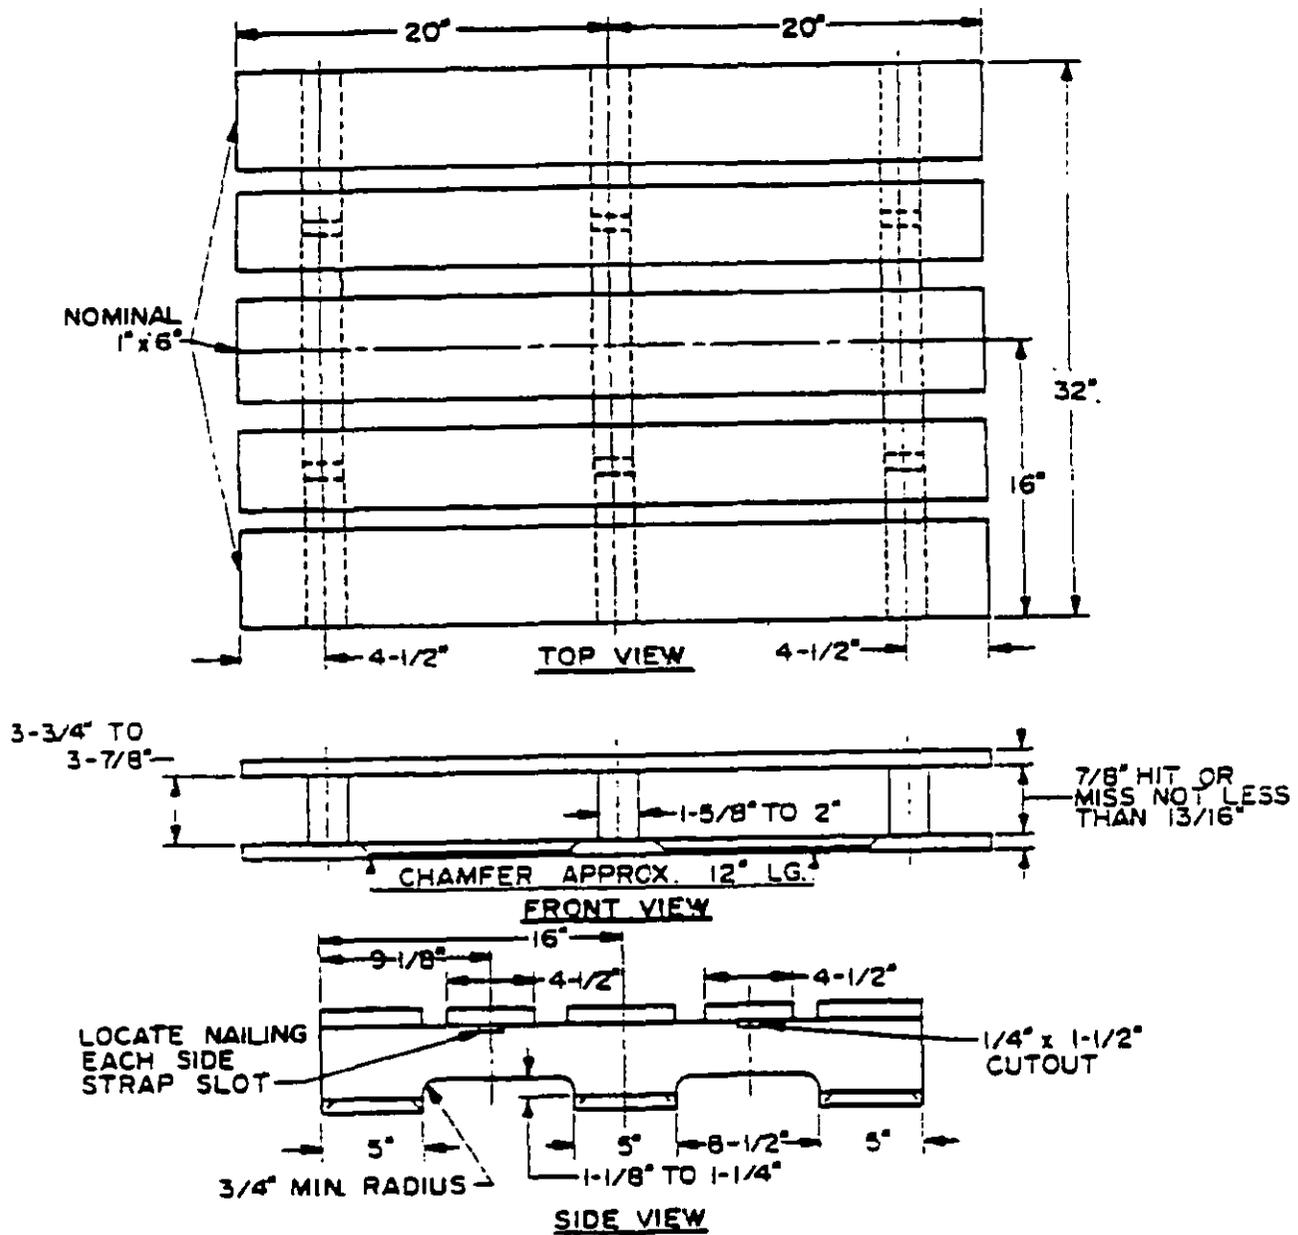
TYPE V, 4-WAY PARTIAL WING, SIZE I (DIMENSIONS SHOWN FOR GROUP III & IV WOODS).
